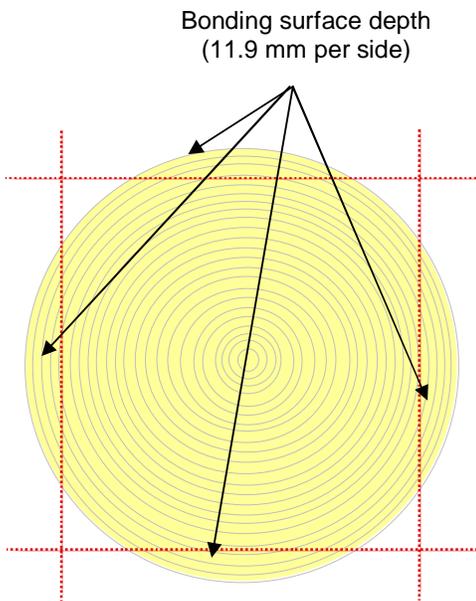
Machine bonding surfaces ($B_s=11.9$ mm for a stem diameter (S_d) of 132 mm)
